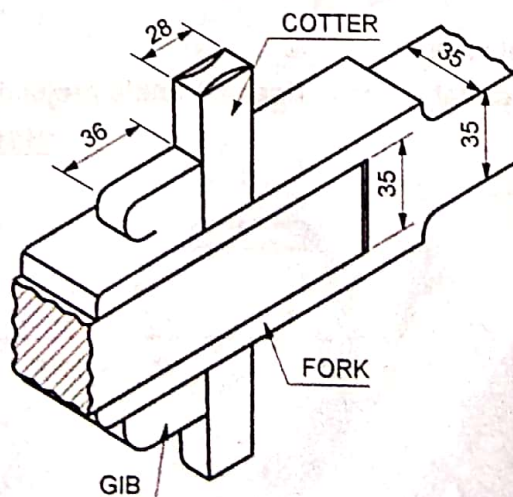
Q. 3.11 : Assembly Drawing (Pictorial View) of Gib and Cotter joint
